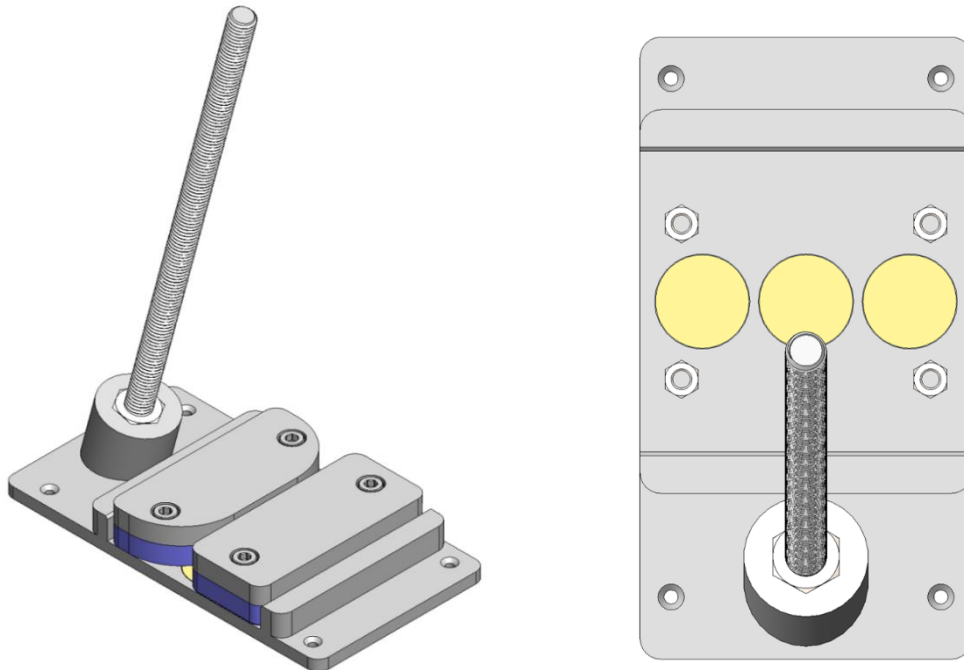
Orthographic (Left) and Top-down (Right) view of bottle cutter assembly.
